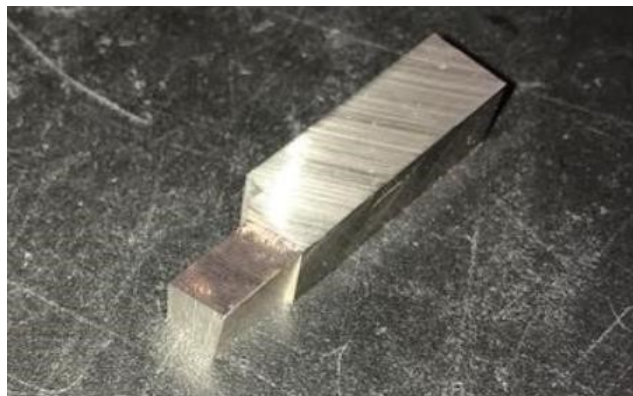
Cleaned tool after a lot of runs of extrusion cutting
